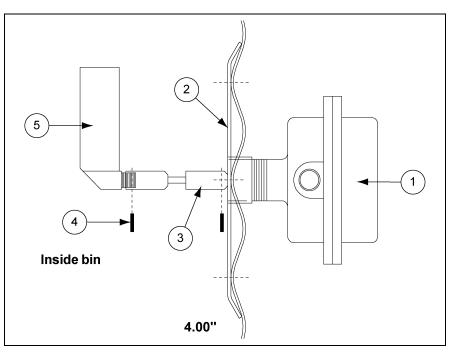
Z Wall Mount Rotary Switch (TAF-6106)
